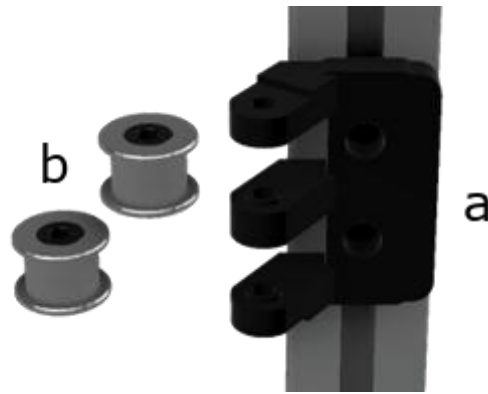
(a) PLA-printed part for mounting (b) smooth tensioning rollers with bearings, designed for a 6 mm GT2 belt.
